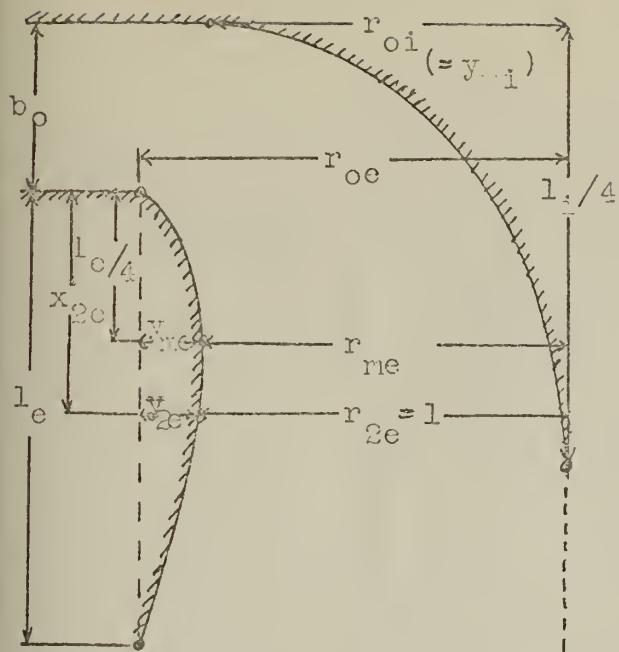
RUNNER PASSAGE DIMENSIONS (21)
